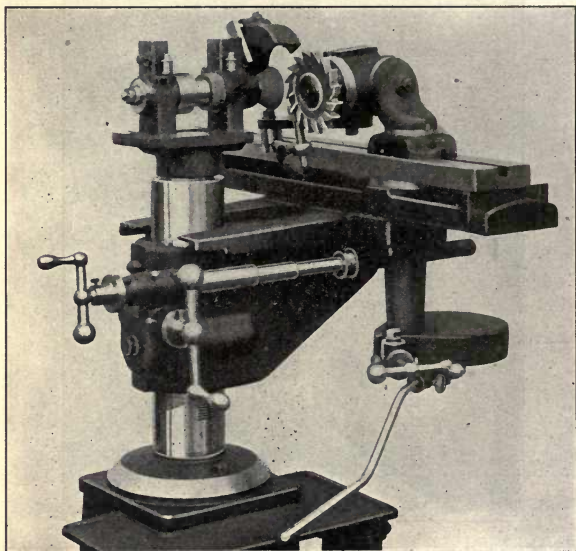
Grinding the side teeth of a milling cutter using the side of the wheel on a Cincinnati grinder.
